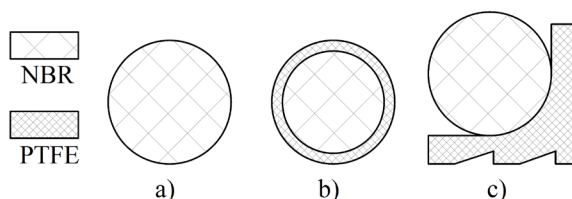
Cross-section geometries of the three seals: a) common O-ring seal; b) coated O-ring seal; c) combined seal
